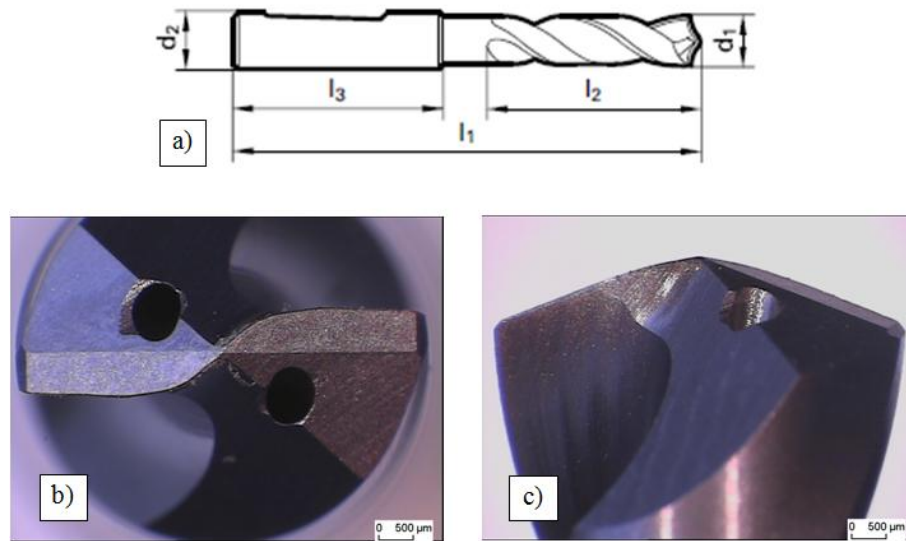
6 mm diameter Guhring DIN 6537 K, TiAlN coated, straight shank solid tungsten carbide twist drill. (a) Side view, (b) Top view and (c) Tool tip
